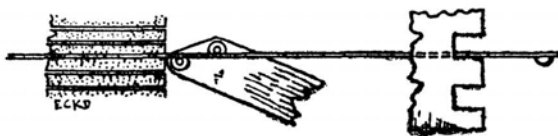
A. POSITION OF "ADJUSTER, SPRING, NO. 1"
